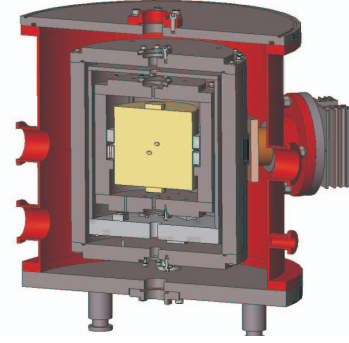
A sectioned view of the ultra-stable cavity assembly.
